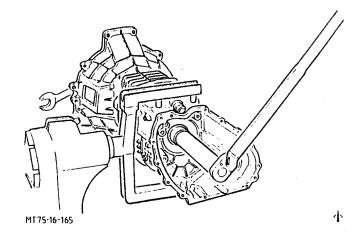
Tighten transmission mainshaft nut using Special Tool 16-051 and torque wrench.
